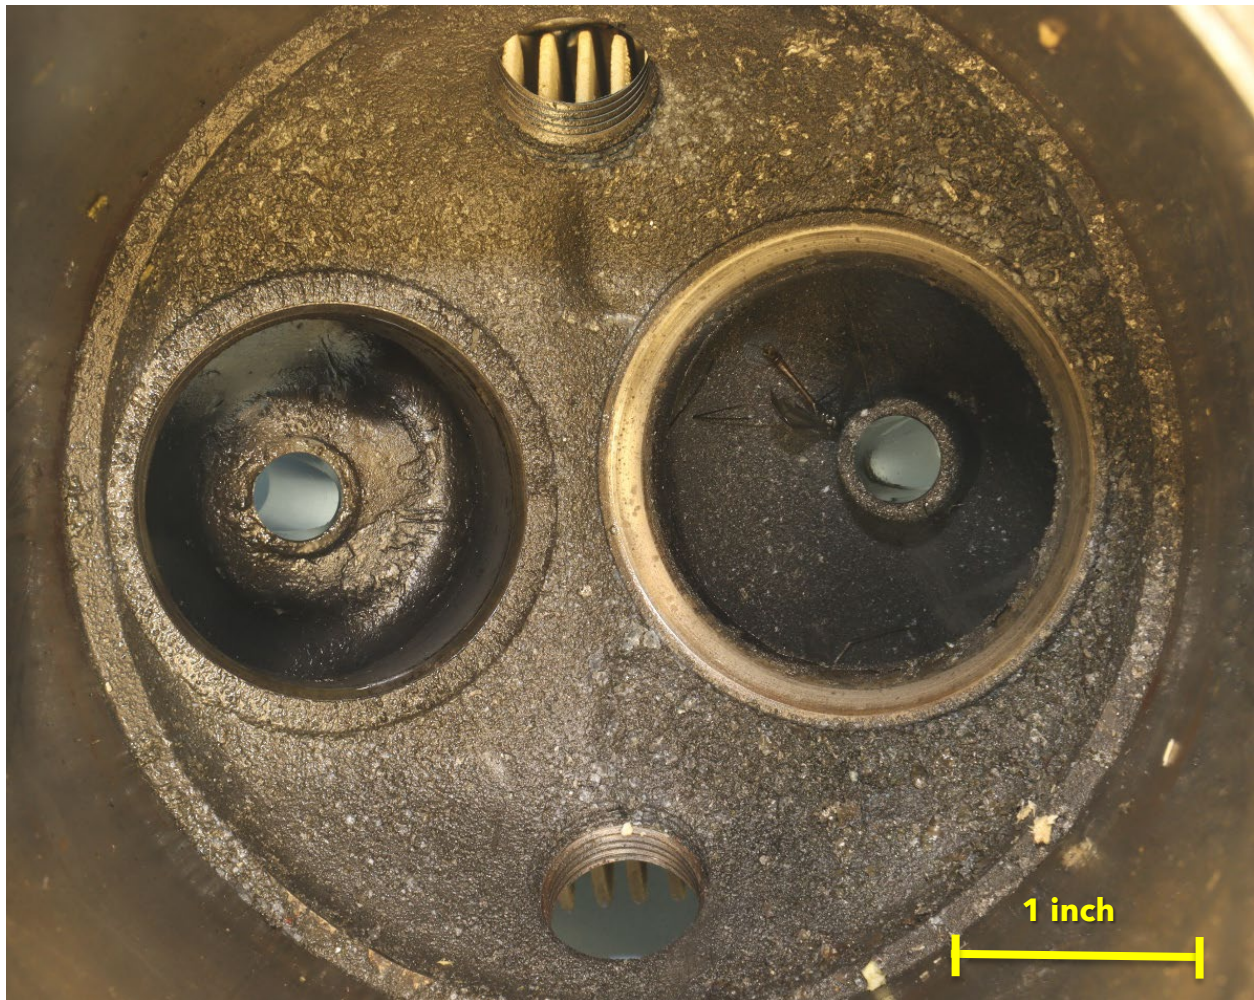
View of the #6 cylinder crown after removal of the valves, showing the condition of the seats.
